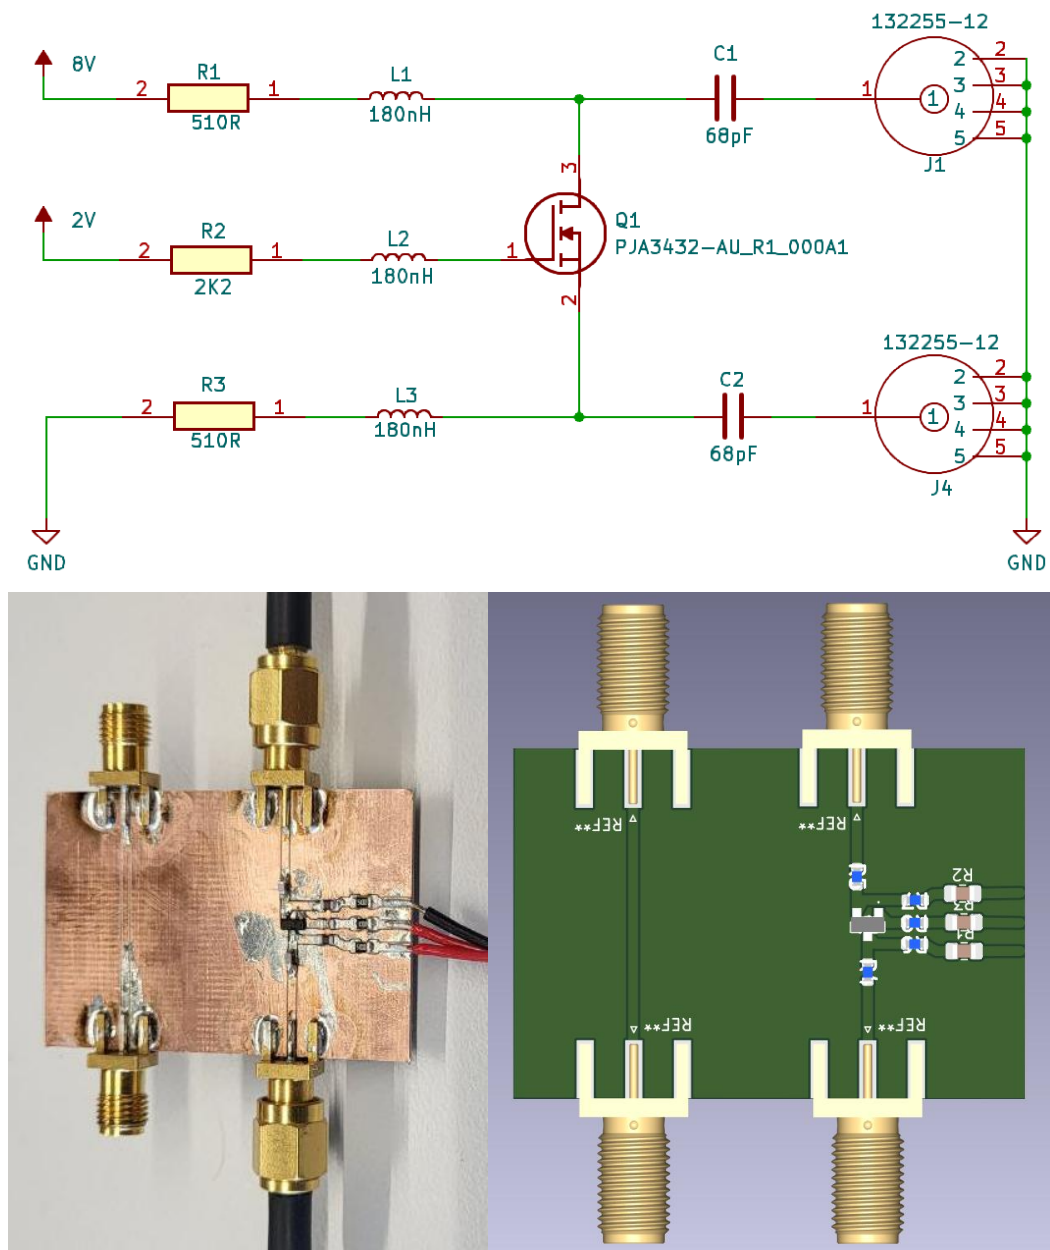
Biasing circuit and PCB design for the MOSFET transistor PJA3432-AU package TO-23.
